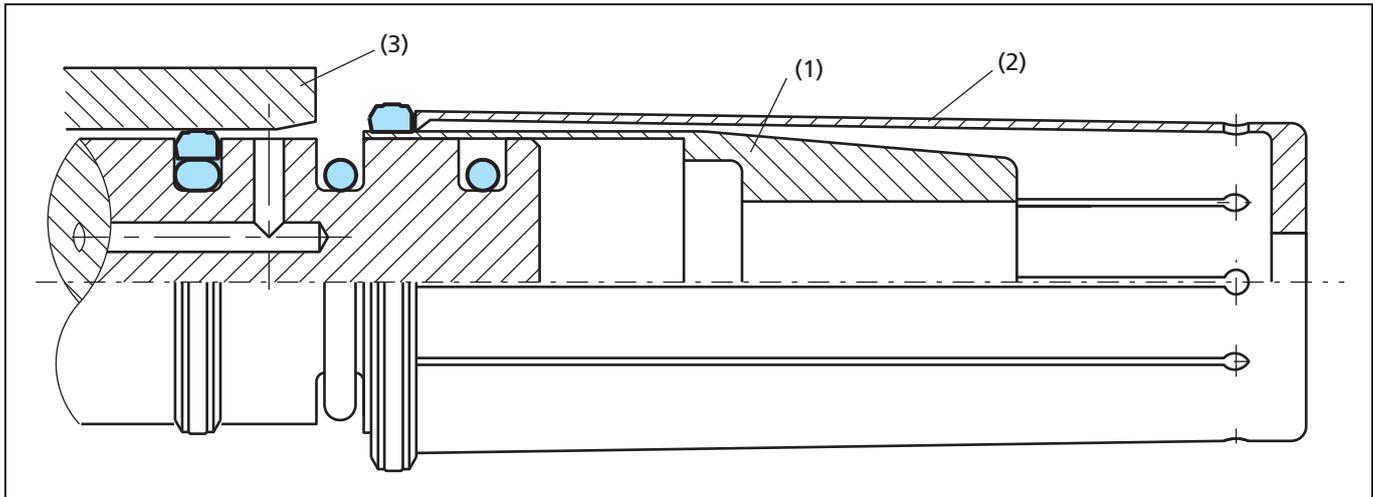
Expanding the Zurcon[®] Roto Glyd Ring[®] S over the installation sleeve using an expanding sleeve
